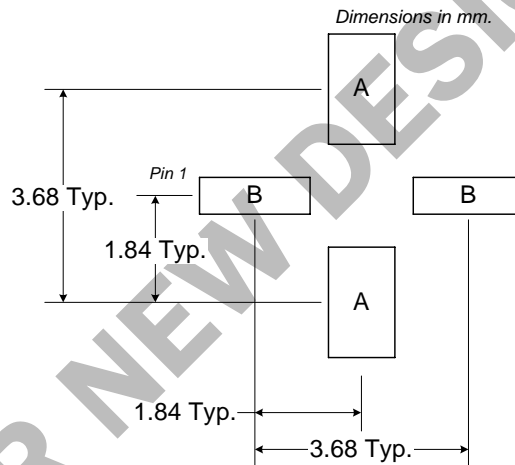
PCB Metal Land Pattern - RF204X (Top View)
